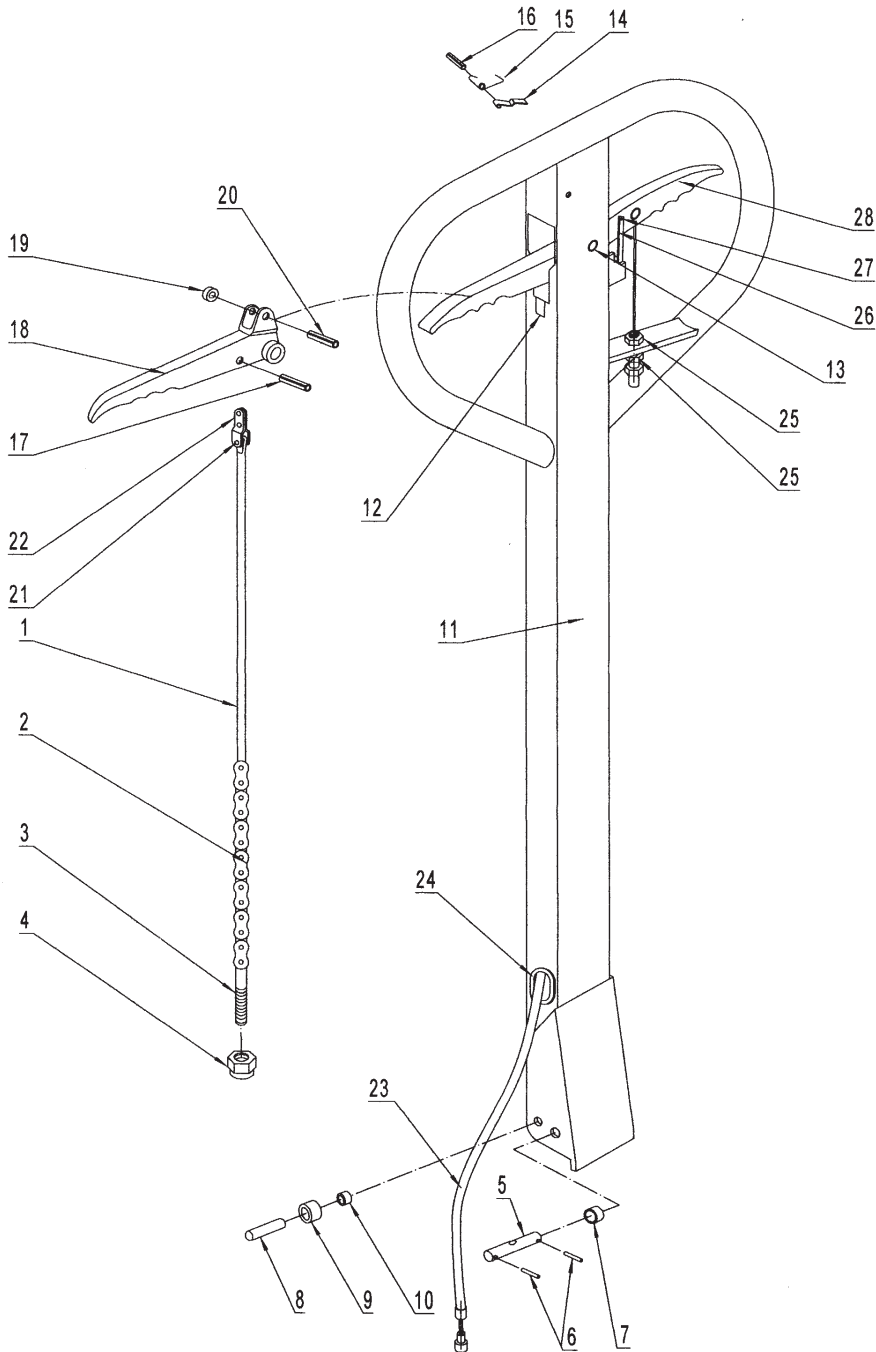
Repair Parts Illustration for Pallet Truck Handle
